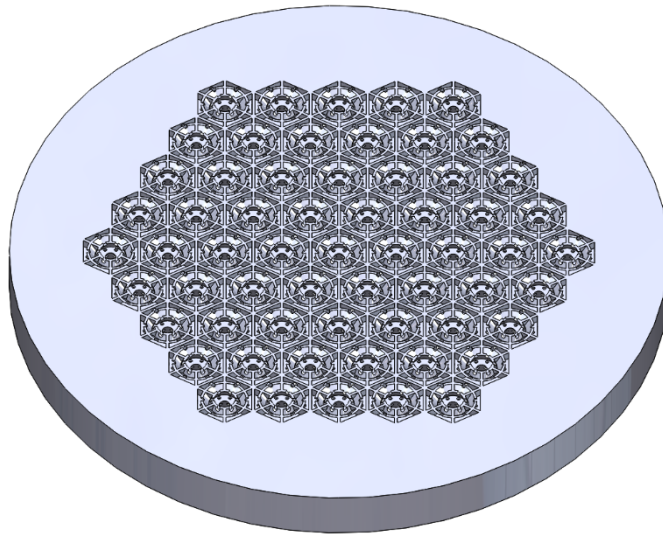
MIMO - Small Cavity AMM Panel - CAD - Horizontal Cross-Section View
